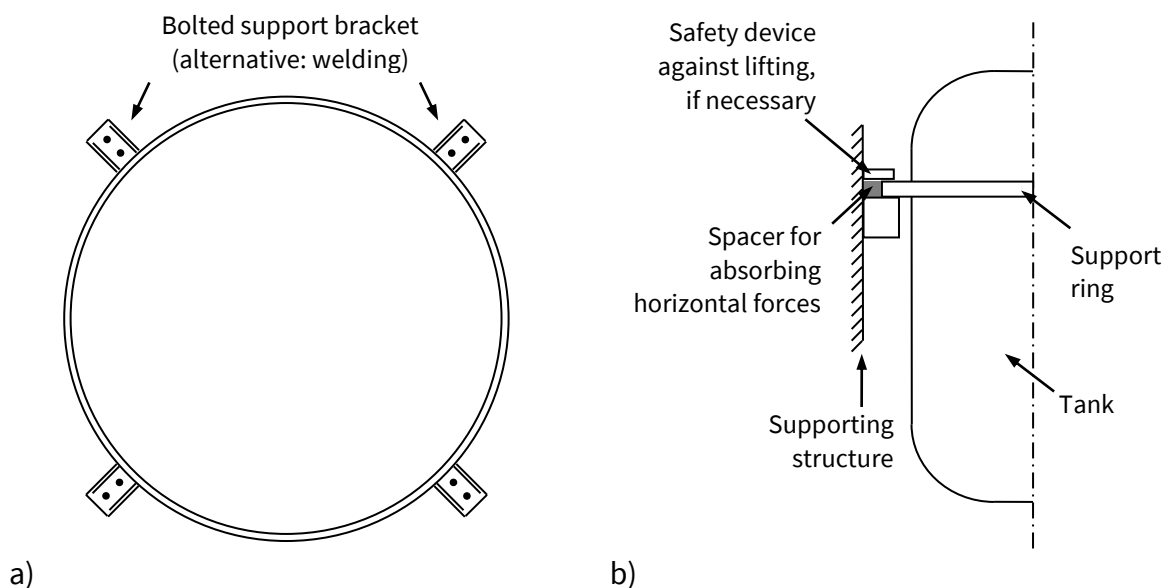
Exemplary storage of suspended vessels; a) Bracket support; b) Support ring with spacer
